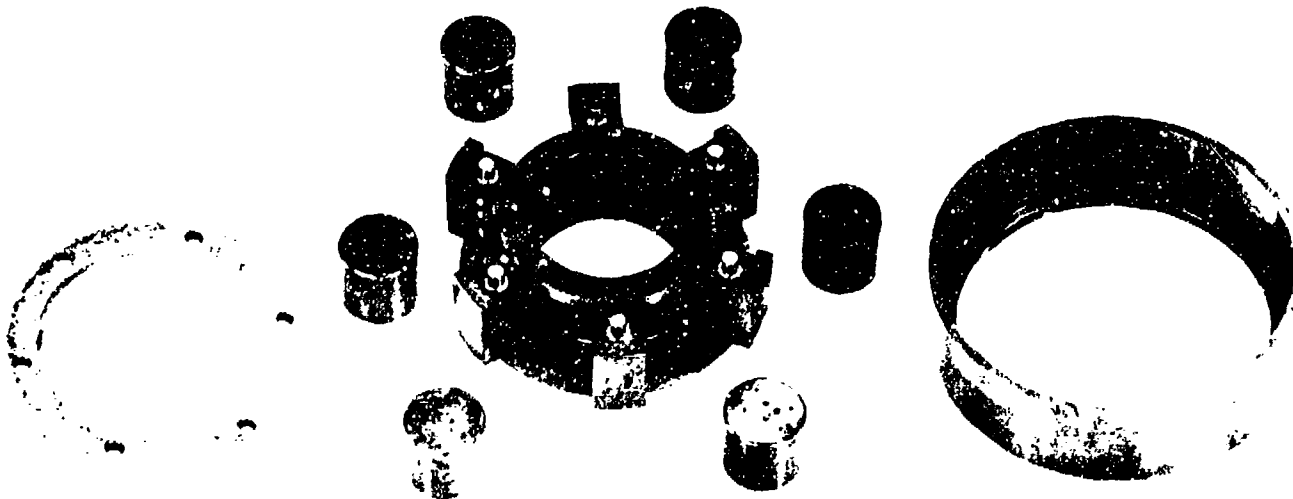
ROLLER BEARING NO. 16 BEFORE TEST
